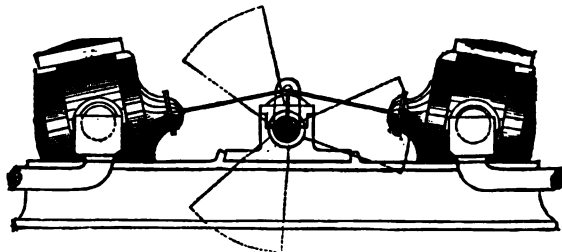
Oscillating-Cylinder Screw-engine, Direct.
